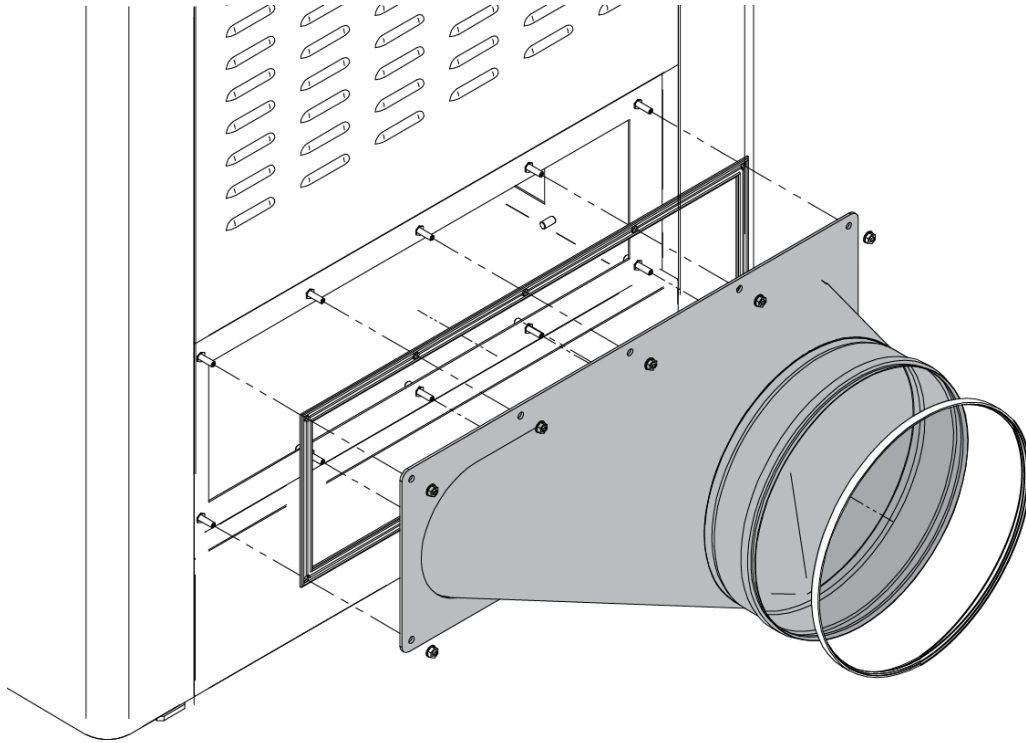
Remove Panels (Step 3) Figure 8-7: Remove Flue Assembly (Step 4)
